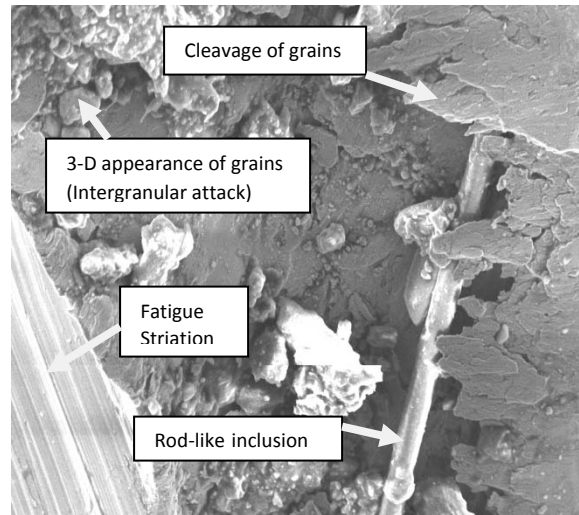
Fractograph of failed weldneck flange of PSV x500
